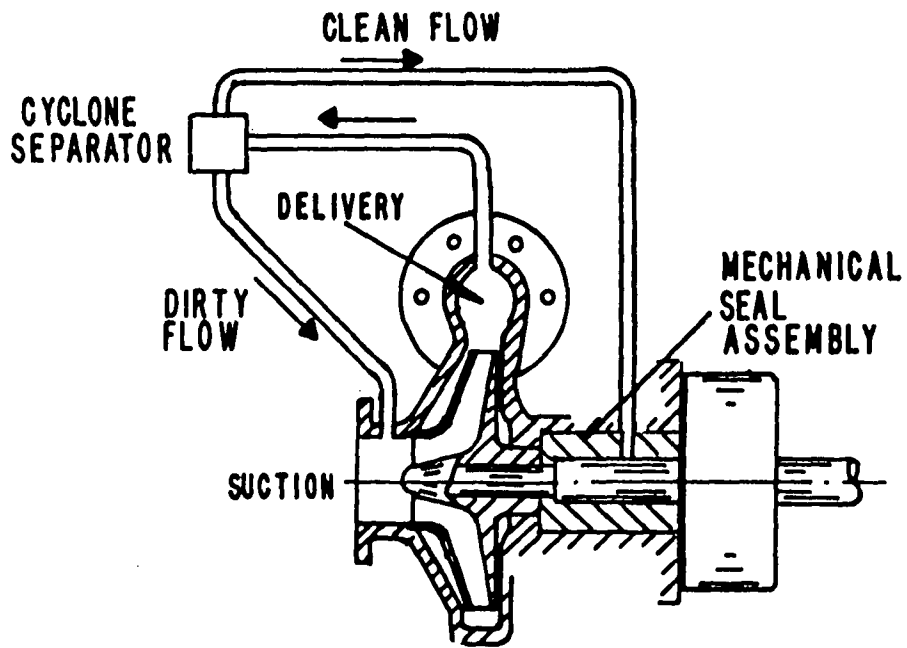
OPEN LOOP COOLING FOR MECHANICAL SEAL
